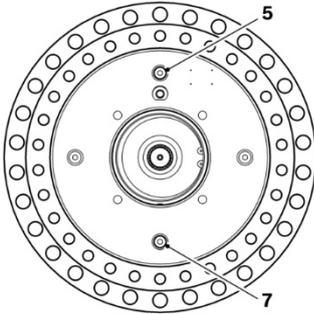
Disassembling planetary gearbox/counter-bearing/cable drum from the equipment frame or the winch base
